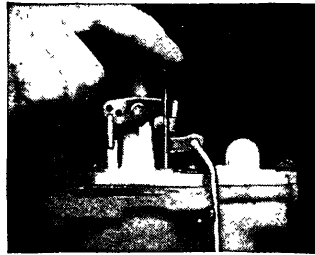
Install metering rod and disc. Make certain rod is in jet. Hook metering rod spring to rod
